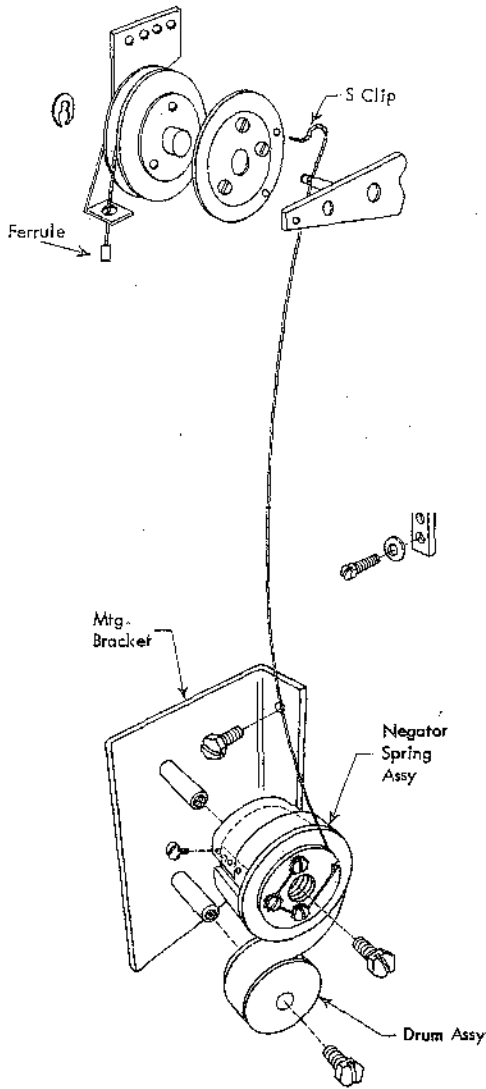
Sliding Glass Spring Drum Pulley Assembly
